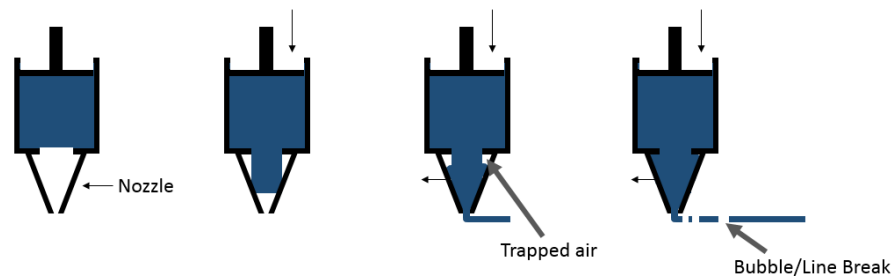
Schematic demonstrating how initial nozzle filling can cause bubbles during printing.
